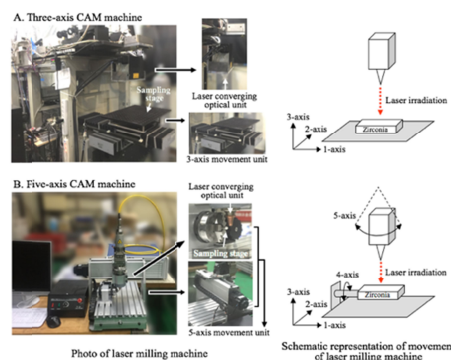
Laser milling machine for producing zirconia crowns directly from fully sintered zirconia blocks
